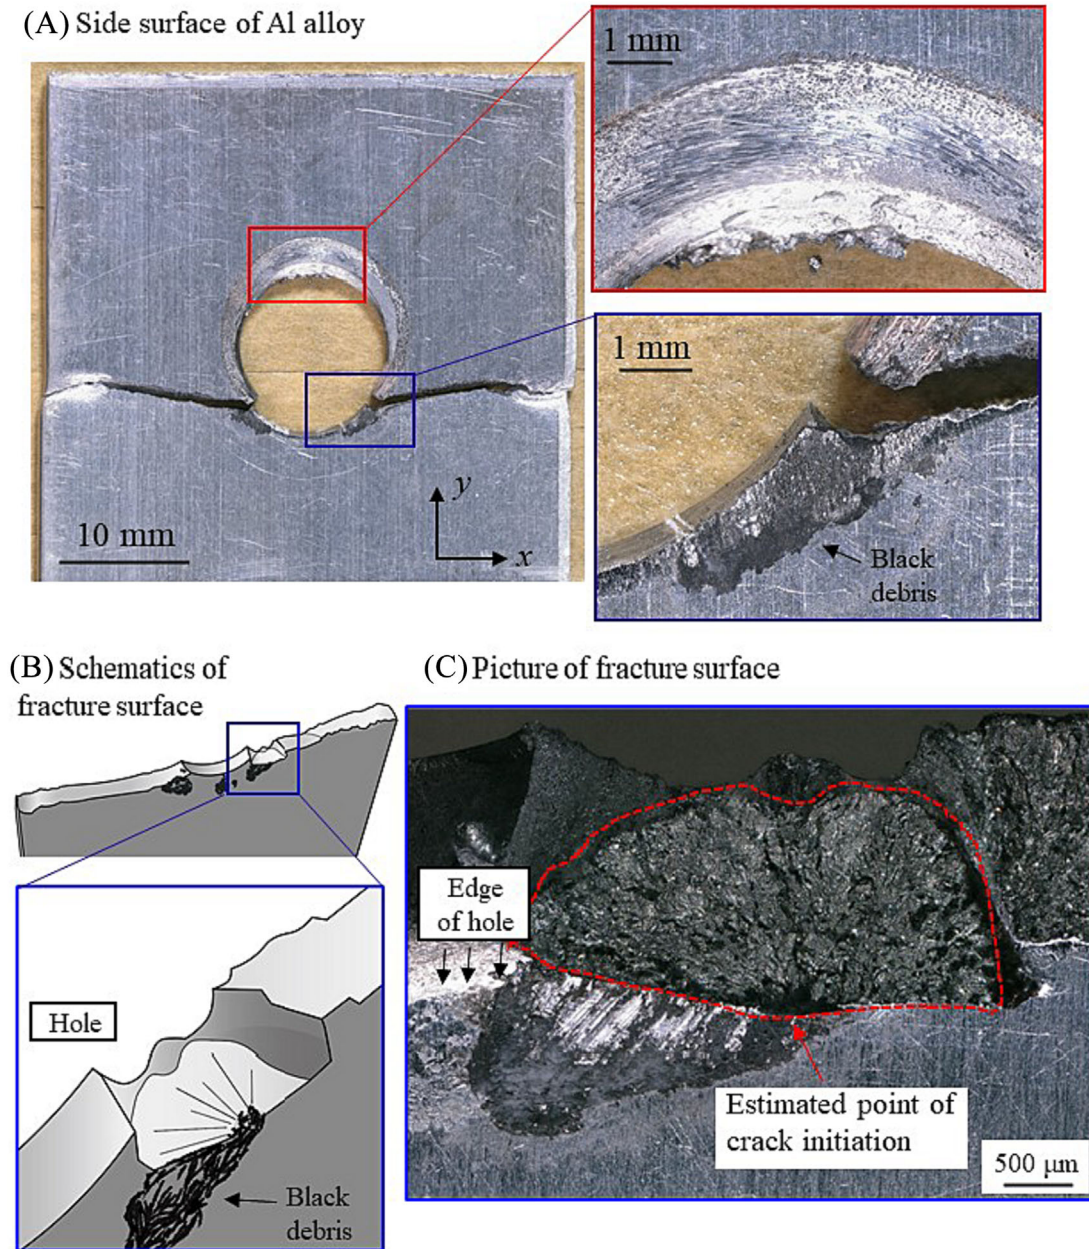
The side view and fracture surfaces of Al alloy in DSW-1 specimen (stress amplitude is 2.25 kN). (A) Side surface of Al alloy, (B) illustration of failed, specimen and (C) fracture surface near the crack initiation site. DSW, dimple spot welding. [Colour figure can be viewed at wileyonlinelibrary.com]
